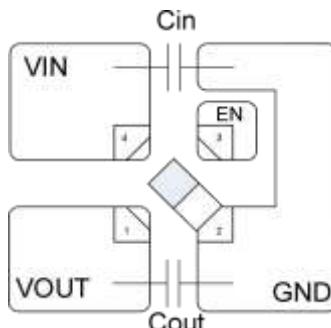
(A), Recommended PCB Layout of OCP2820VxxAD
